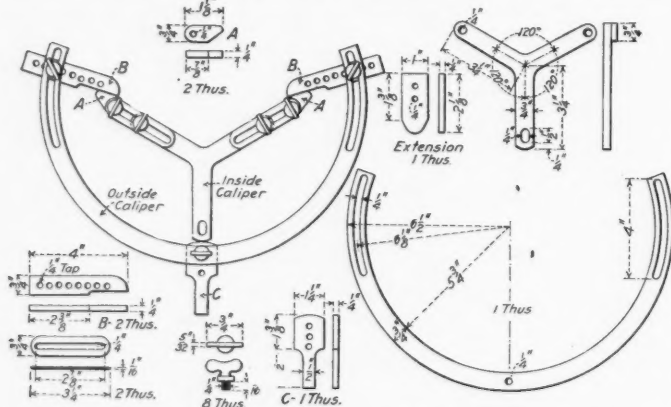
Caliper for Driving Boxes and Brasses. Dailey.
